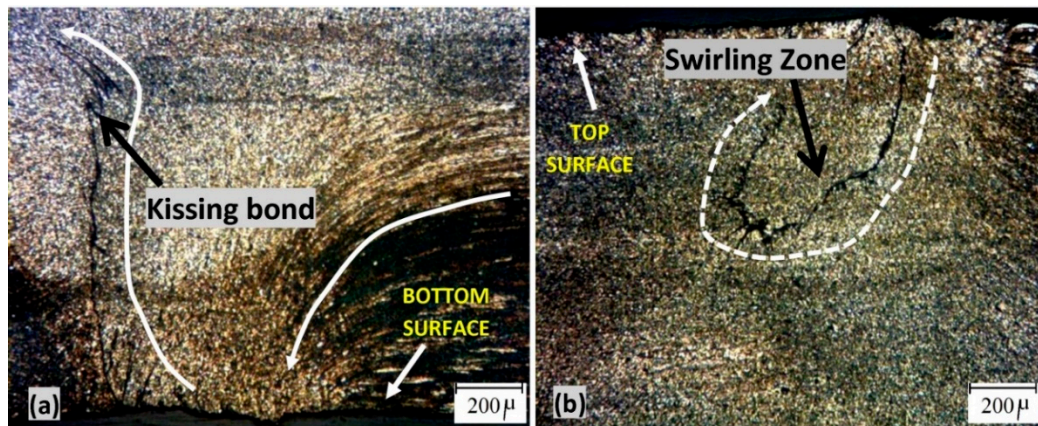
Micro-void features visible in stirring zone of the FSW weld, known as a tunnel void, observed in: (a) conical tool and (b) square tool welds.
